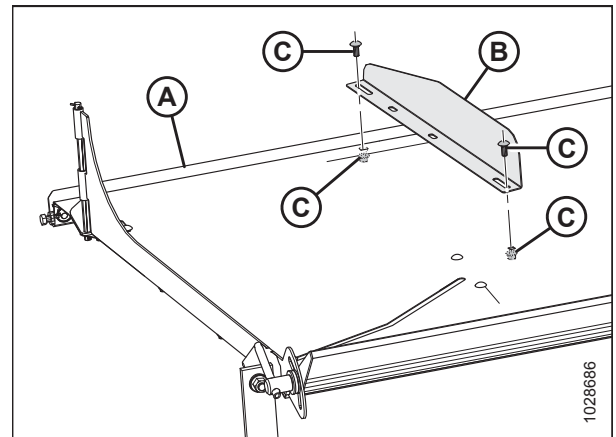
Forming Shield Cover Upside Down — Right Side Shown
